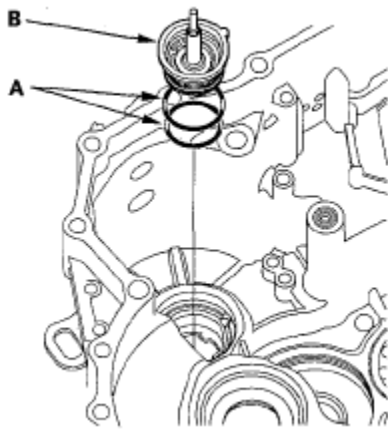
Identifying O-Rings On ATF Feed Pipe Cap
